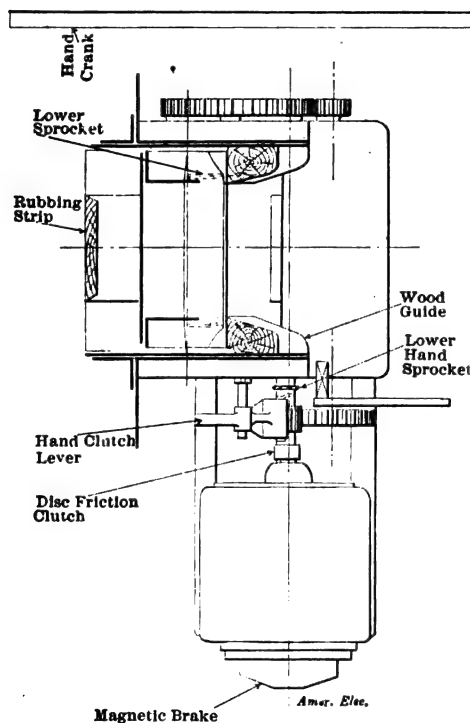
PLAN OF CHAIN HOIST GEARING.
